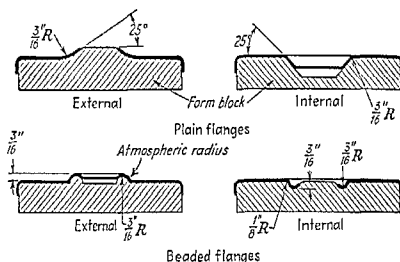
Rubber-formed lightening-hole flanges.⁶
